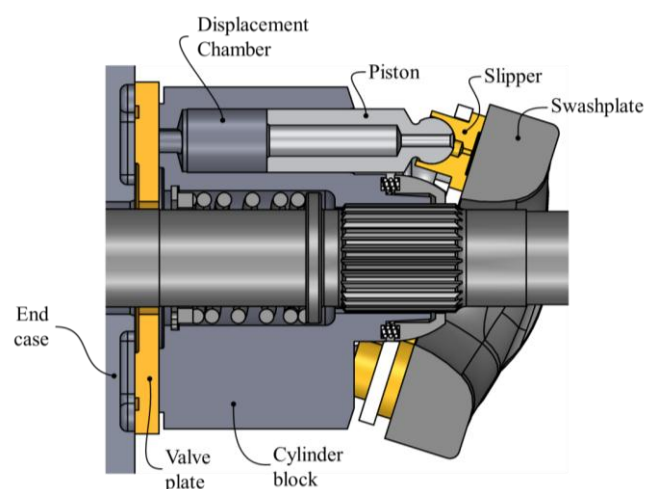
Swash-Plate Type Axial Piston Machine Cross Section
